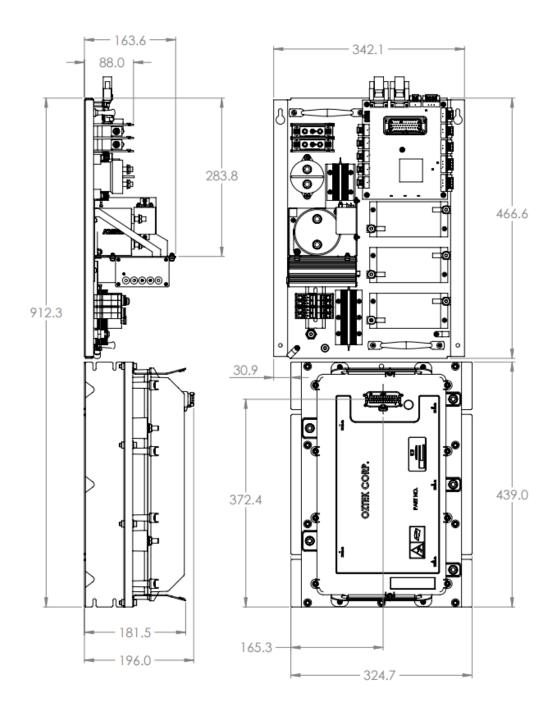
11445-01 Product Dimensions (in millimeters)
